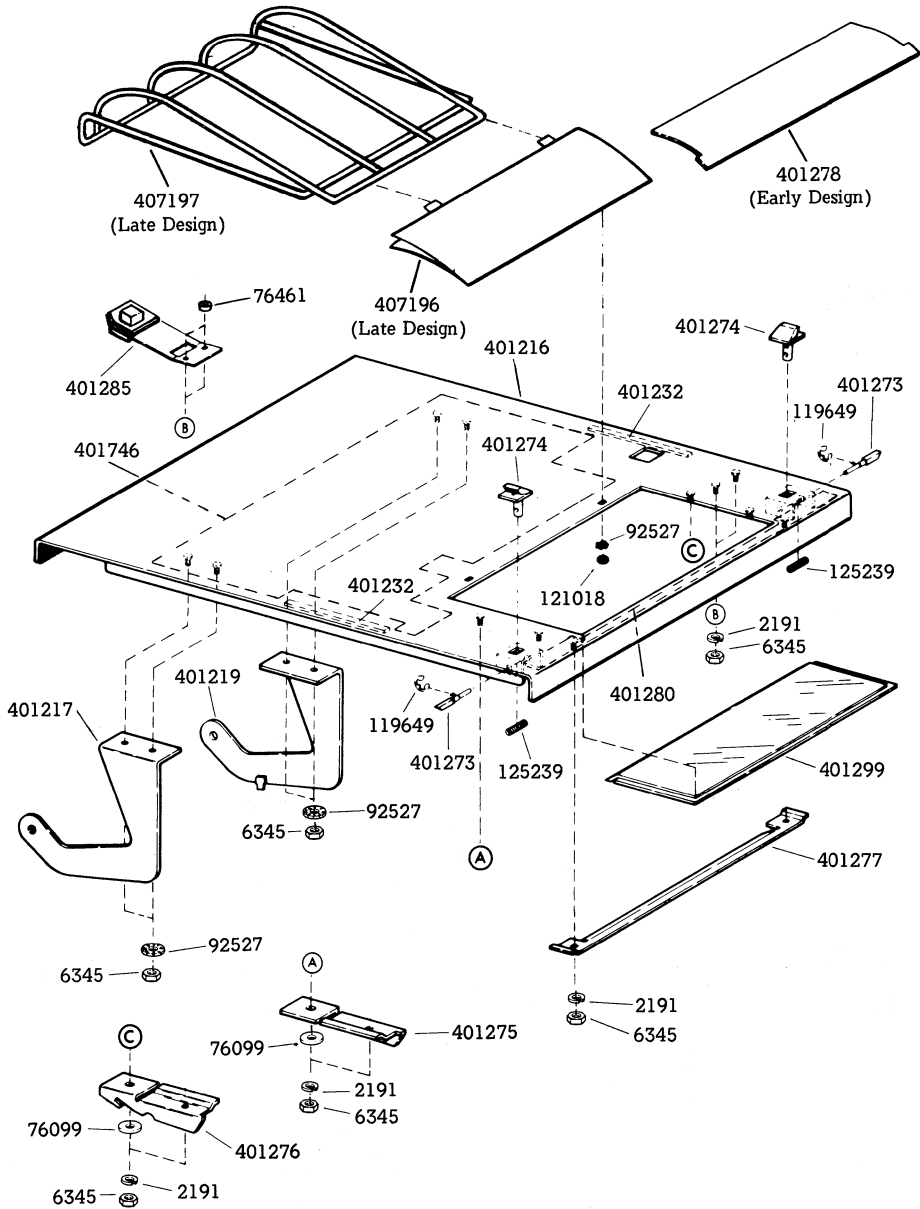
40CAB201/ZZ Printer Cabinet Core for Adjacent or RO Friction Feed Printer (Cont)
